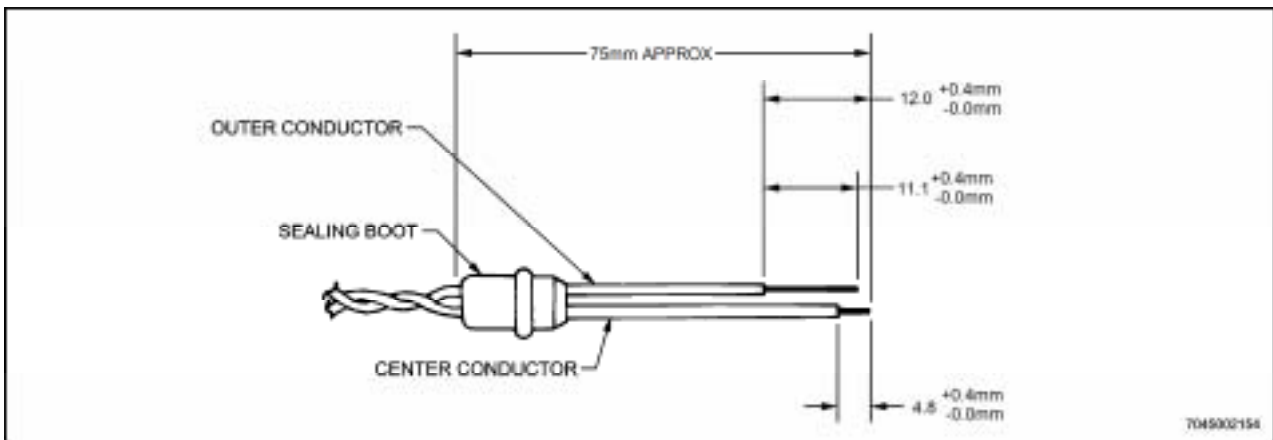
Stripping Dimensions and Sealing Boot Before Crimping the Contact
